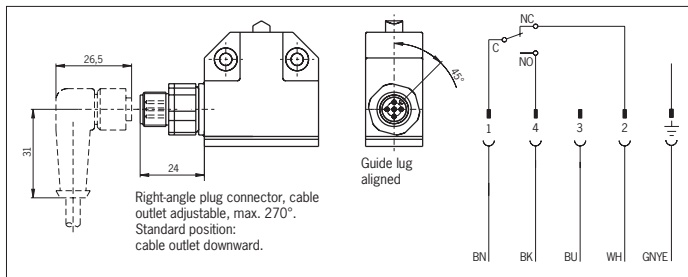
Dimension drawing/connection diagram NO1.550SVM5 with plug connector M12 (SVM5, 5-pin)
